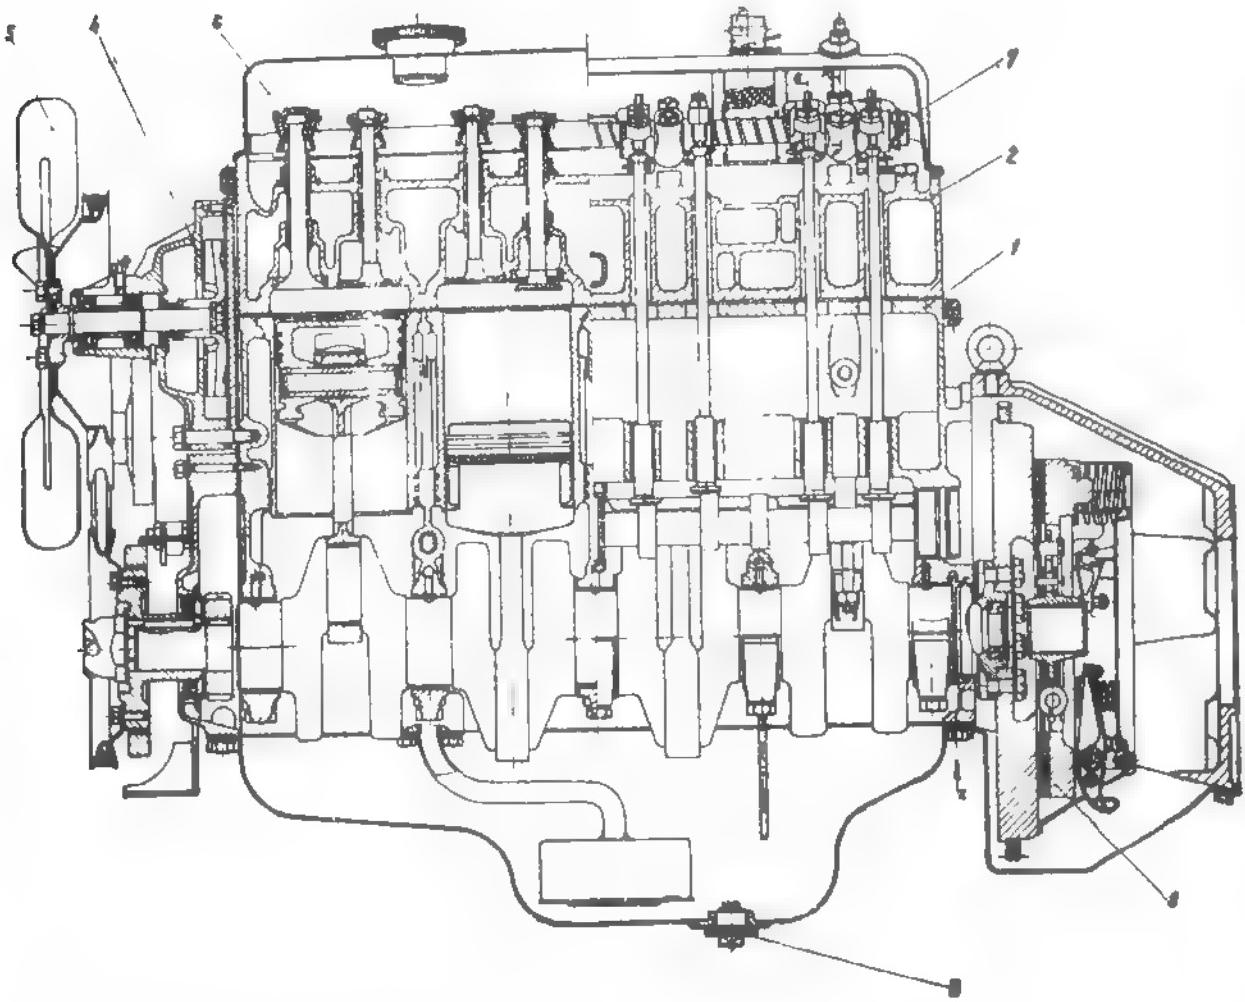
LONGITUDINAL SECTION OF ARO L-25 ENGINE
